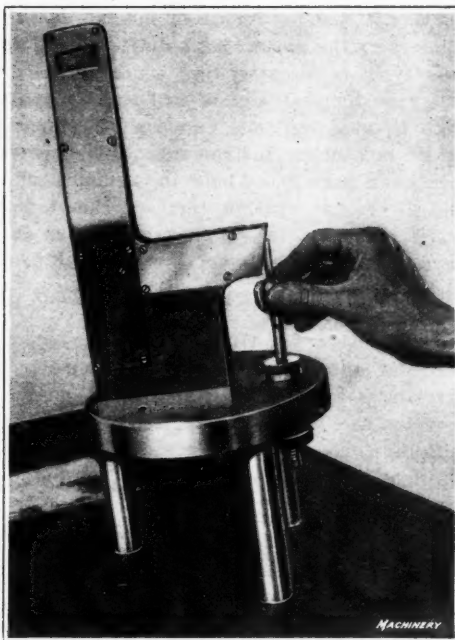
Indicating Gage for testing Balls during Process of Manufacture
